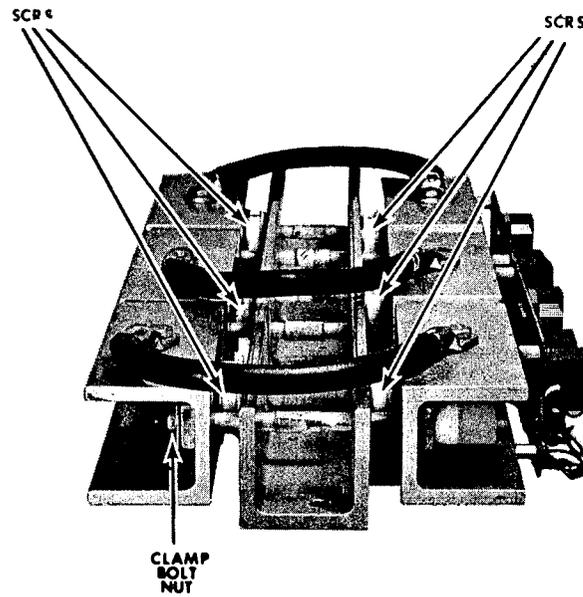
SCR Heatsink Configuration, "U" Clamp Type Without Force Indicator
